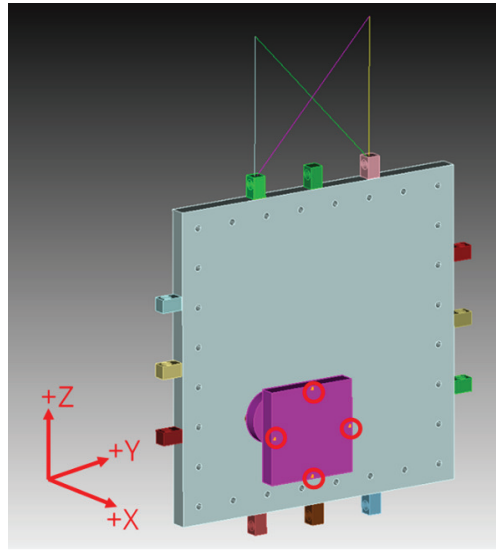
Cantilever fixture mounted in the (-4.5, -4.5) configuration with point masses on each edge of the surrogate fixture.
